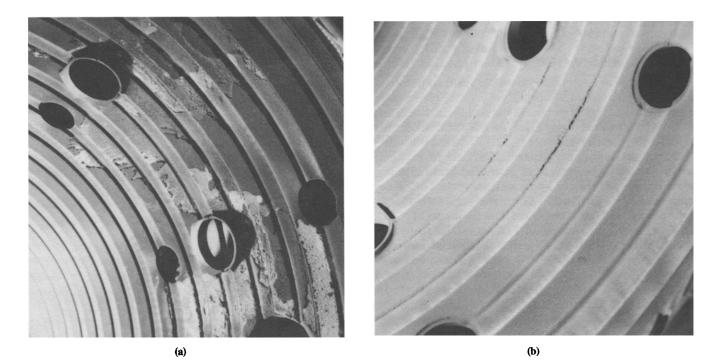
Photographs of TBC coated combustion liners after more than 6000 h in MS7001E machine. (a) 0.5 mm (20 mils) thick porous coating and (b) 1.1 mm (45 mils) thick dense coating. The dilution holes are approximately 3 cm in diameter.
